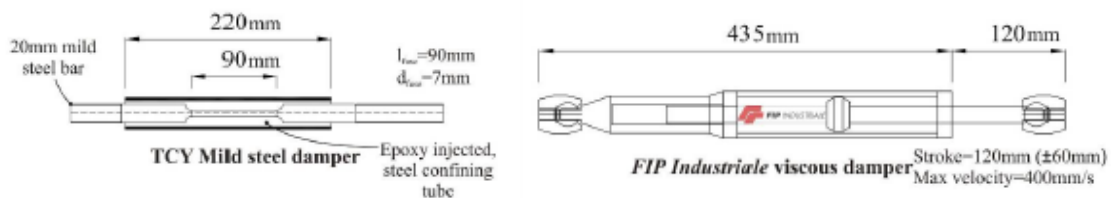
Damper details, Mild Steel Damper (left), FIP Industriale Viscous Damper (right) [23]
